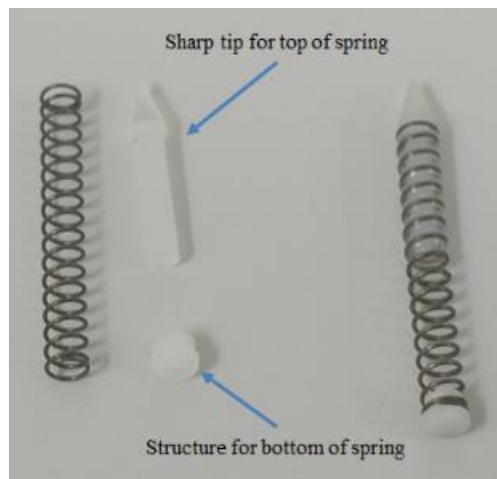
Optical image of the spring and Structure for mounting
